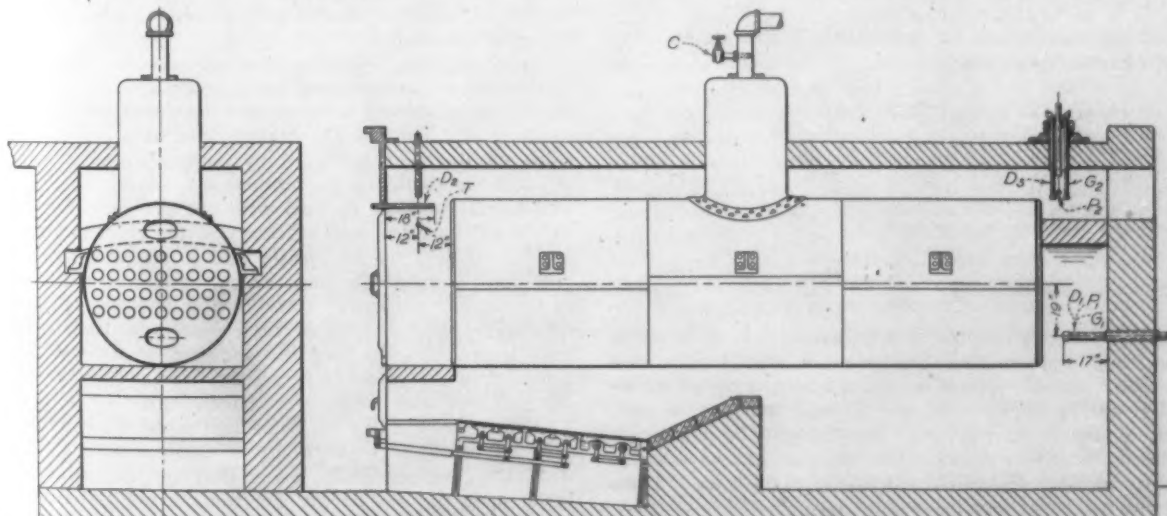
SECTIONS SHOWING BOILER AND FURNACE AS GIVEN IN A TEST REPORT
